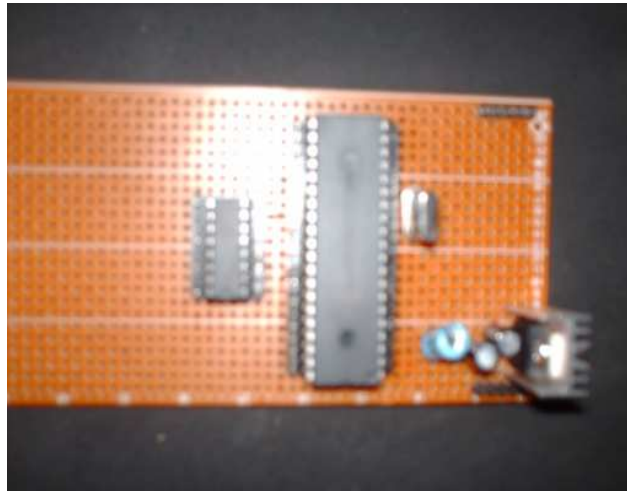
Controller board with PIC 16F877A, power supply unit and motor driver L293D
